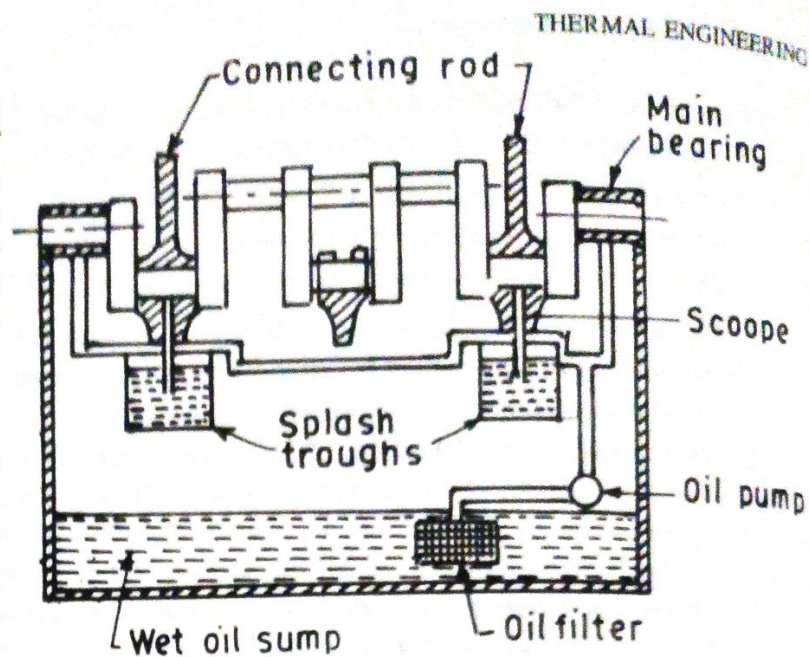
Splash lubrication for multi-cylinder engine.
